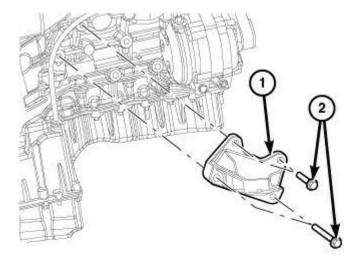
Right Engine Mount & Bolts Courtesy of CHRYSLER GROUP, LLC
